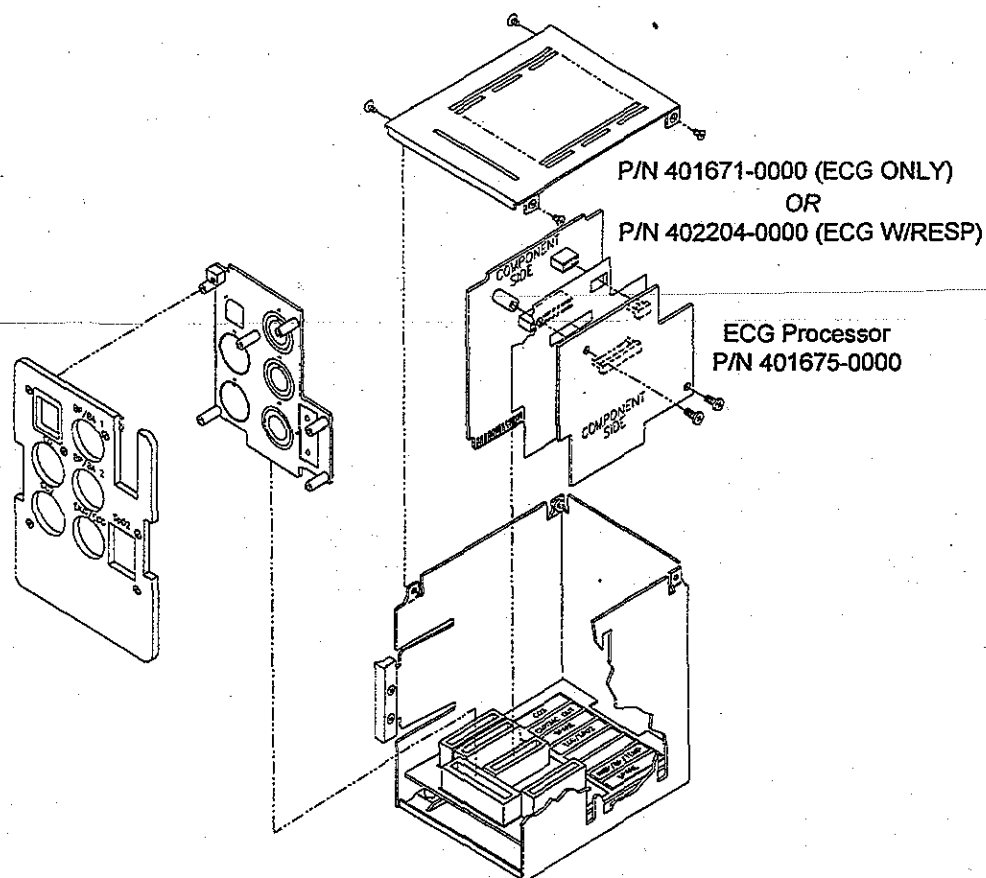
ECG Only & ECG/Respiration Options - Exploded View
